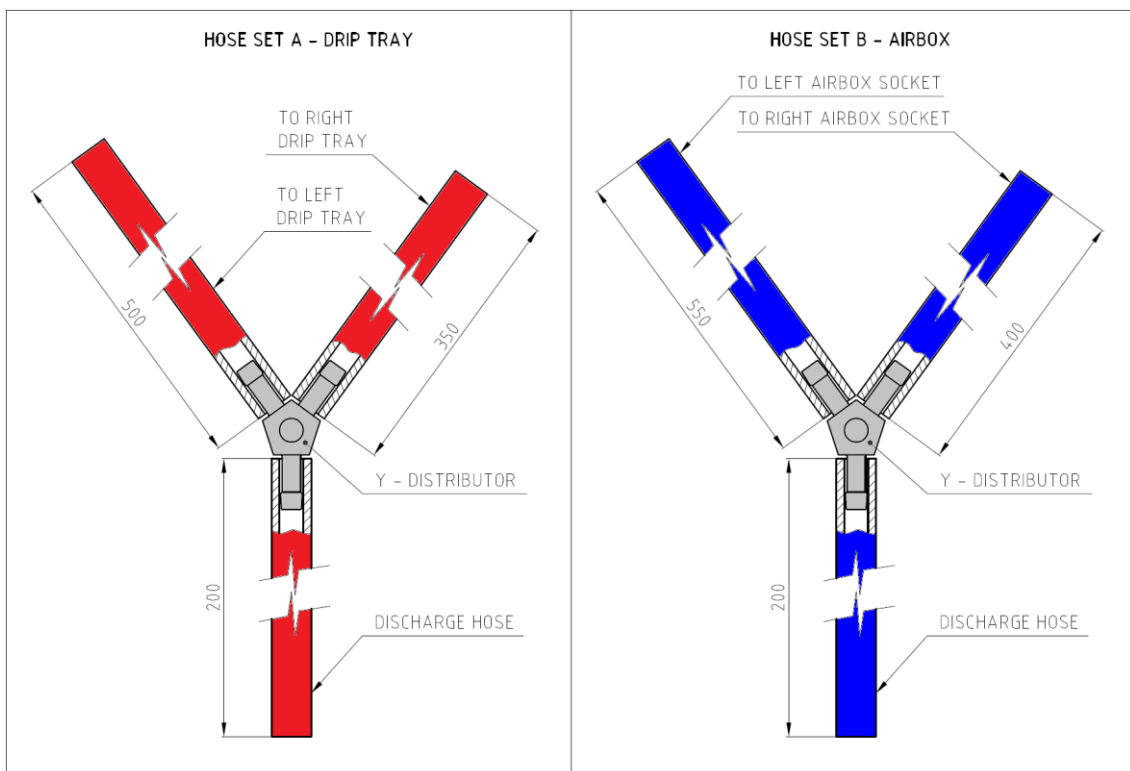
Scheme of hose sets – Rotax 912, retractable landing gear
